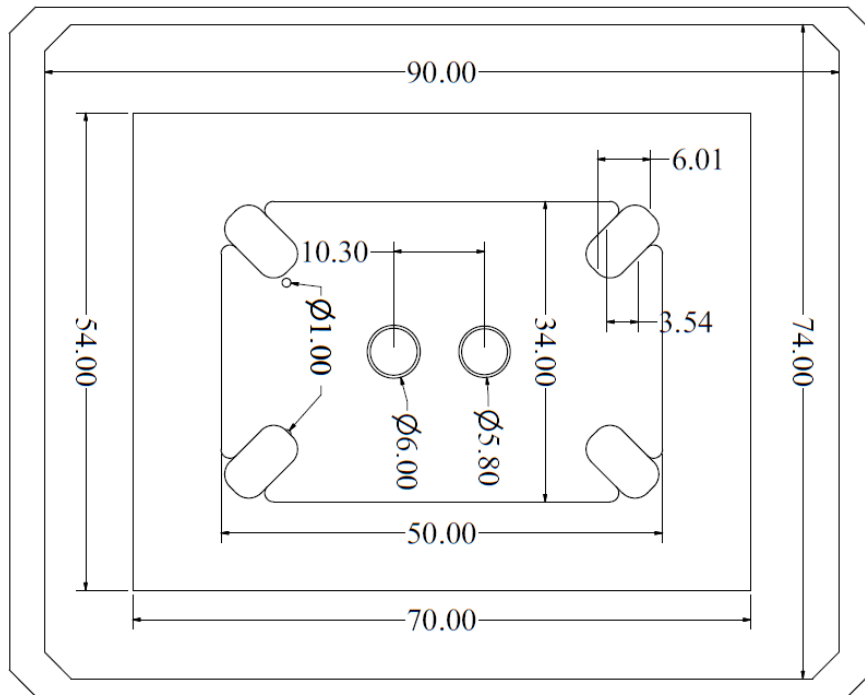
2D drawing correspondent to the peloid sample holder: inside top view (2 holes for temperature measurement (6.00 mm and 5.80 mm diameter) and 2 holes used by Ni-Cr wire (1.00 mm diameter each)).
